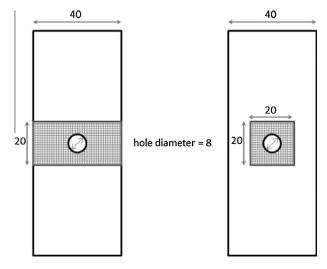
Mid gauge section details of the full face (left) and patch (right) test specimens (total length of specimens = 330 mm, all dimensions quoted in mm).
